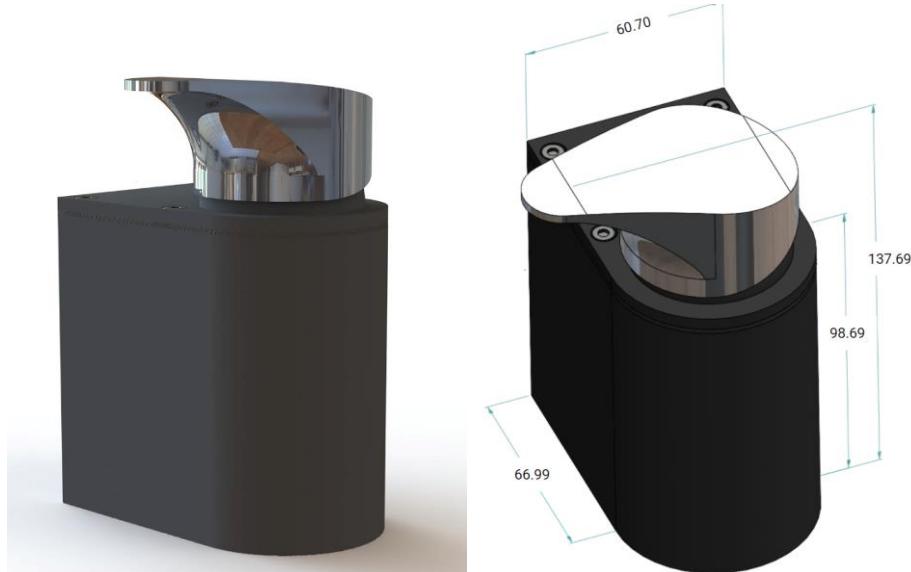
Faucet Attachment System CAD & Key Dimensions (in mm)
